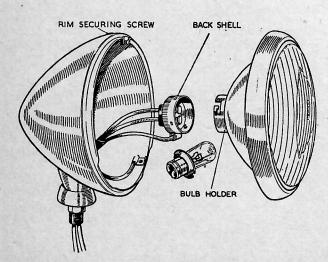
Component parts of the headlamp as fitted to Series 4A and 4AB.
